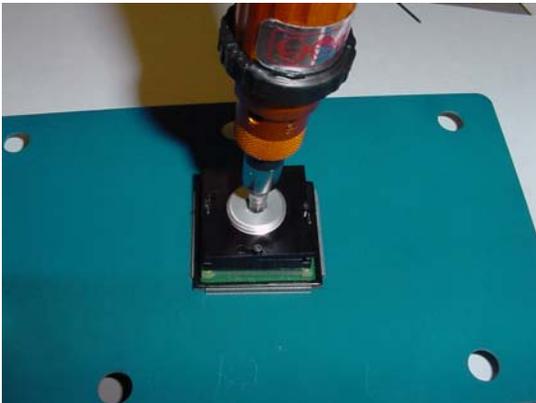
Assembly step 7 – tighten top compression screw using Pre-Set 3 lbf-in Torque Limiting Screw driver
